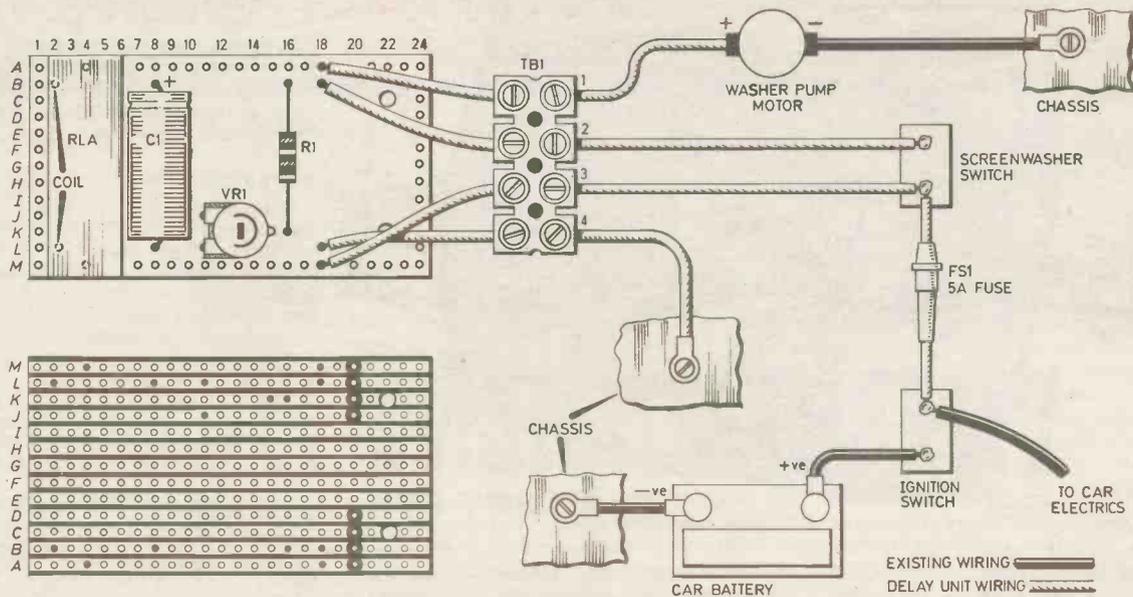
Layout of the components on the stripboard, breaks to be made on the underside and wiring details to the existing car electrics.
